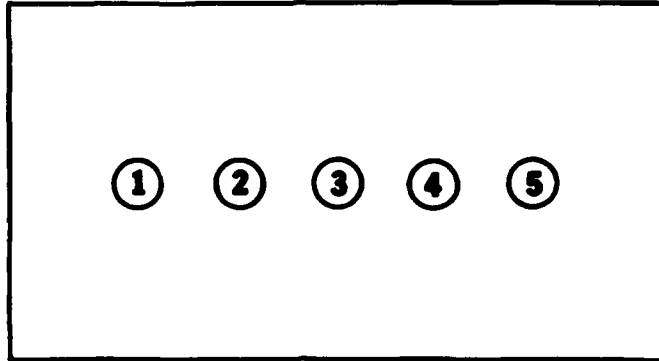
Five-Hole In-Line Fastener Pattern Used for Specimen #3.
